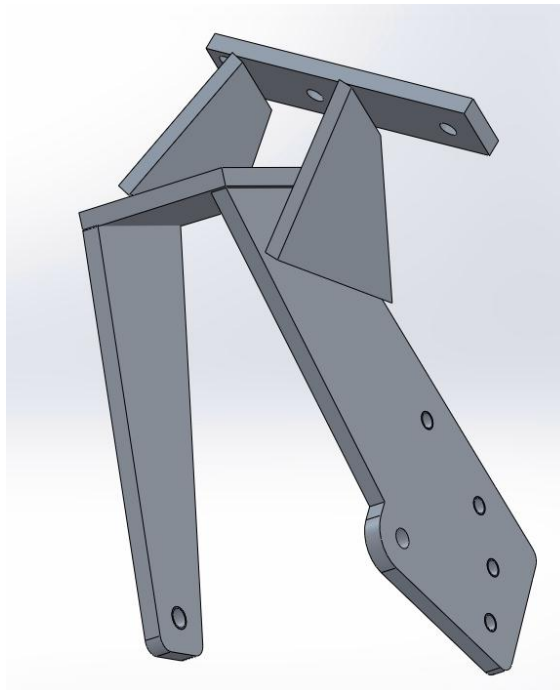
7- Disc holder, part 1 in Figure 3-5
